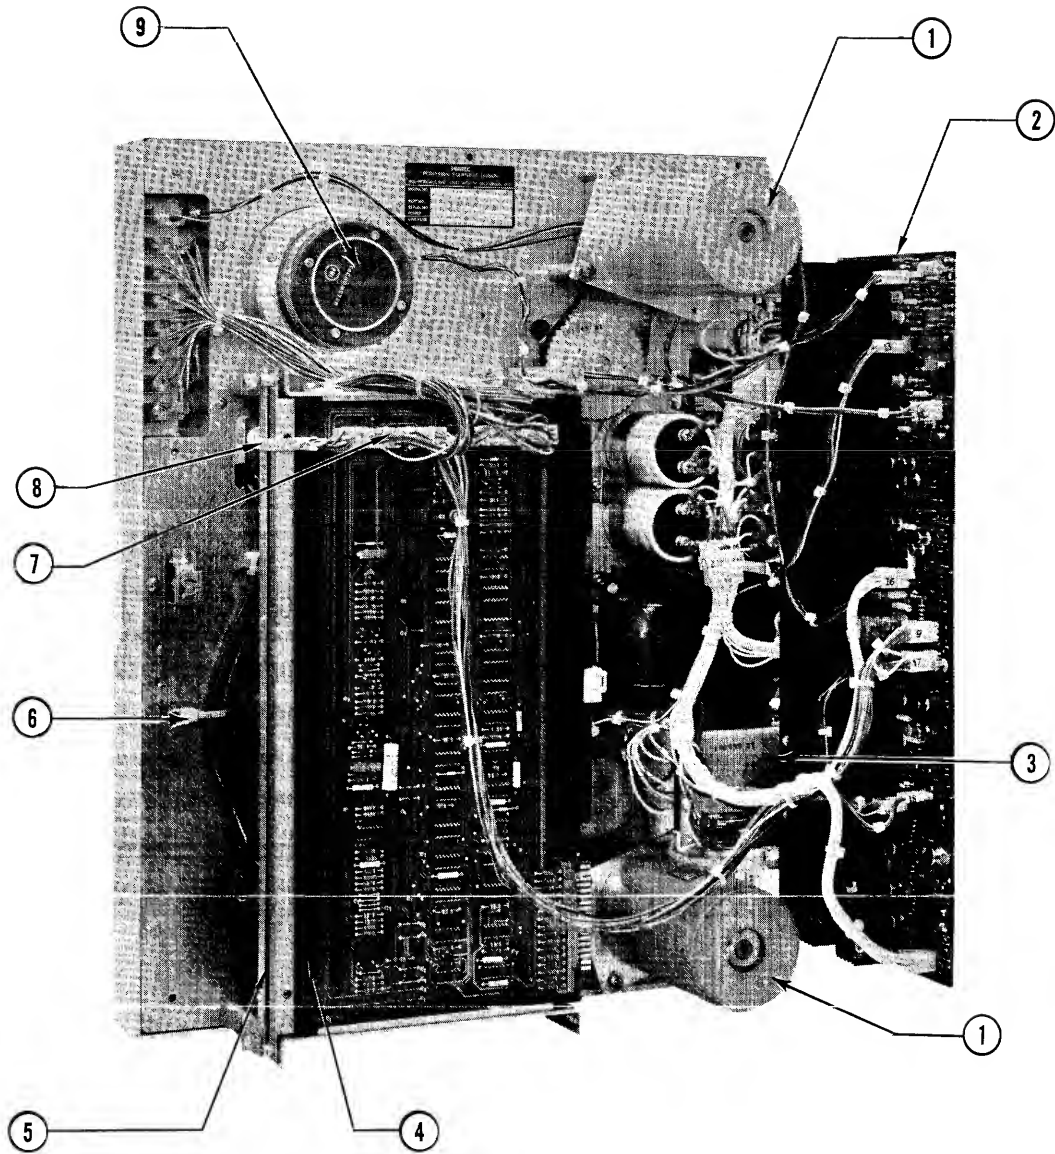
T6000 Series Transports Photo Parts Index, Rear View with Card Cage
